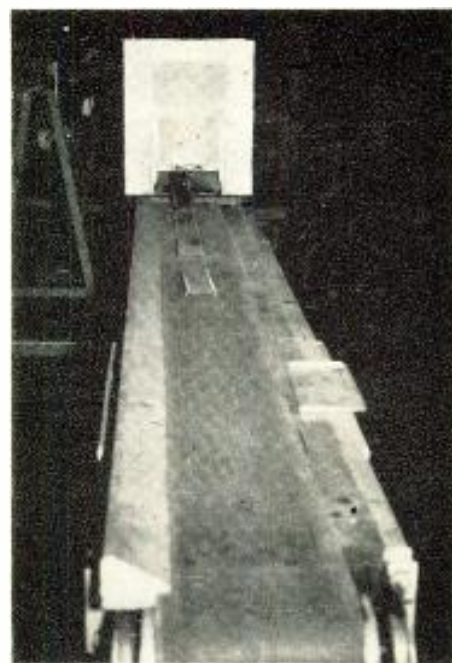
Discharge conveyor; looking toward Soldering Station hood
